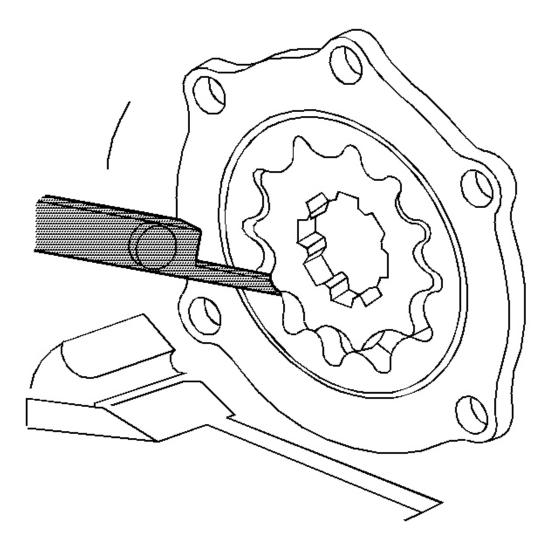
Measuring Inner Oil Pump Gear Tip Clearance Courtesy of GENERAL MOTORS CORP.
